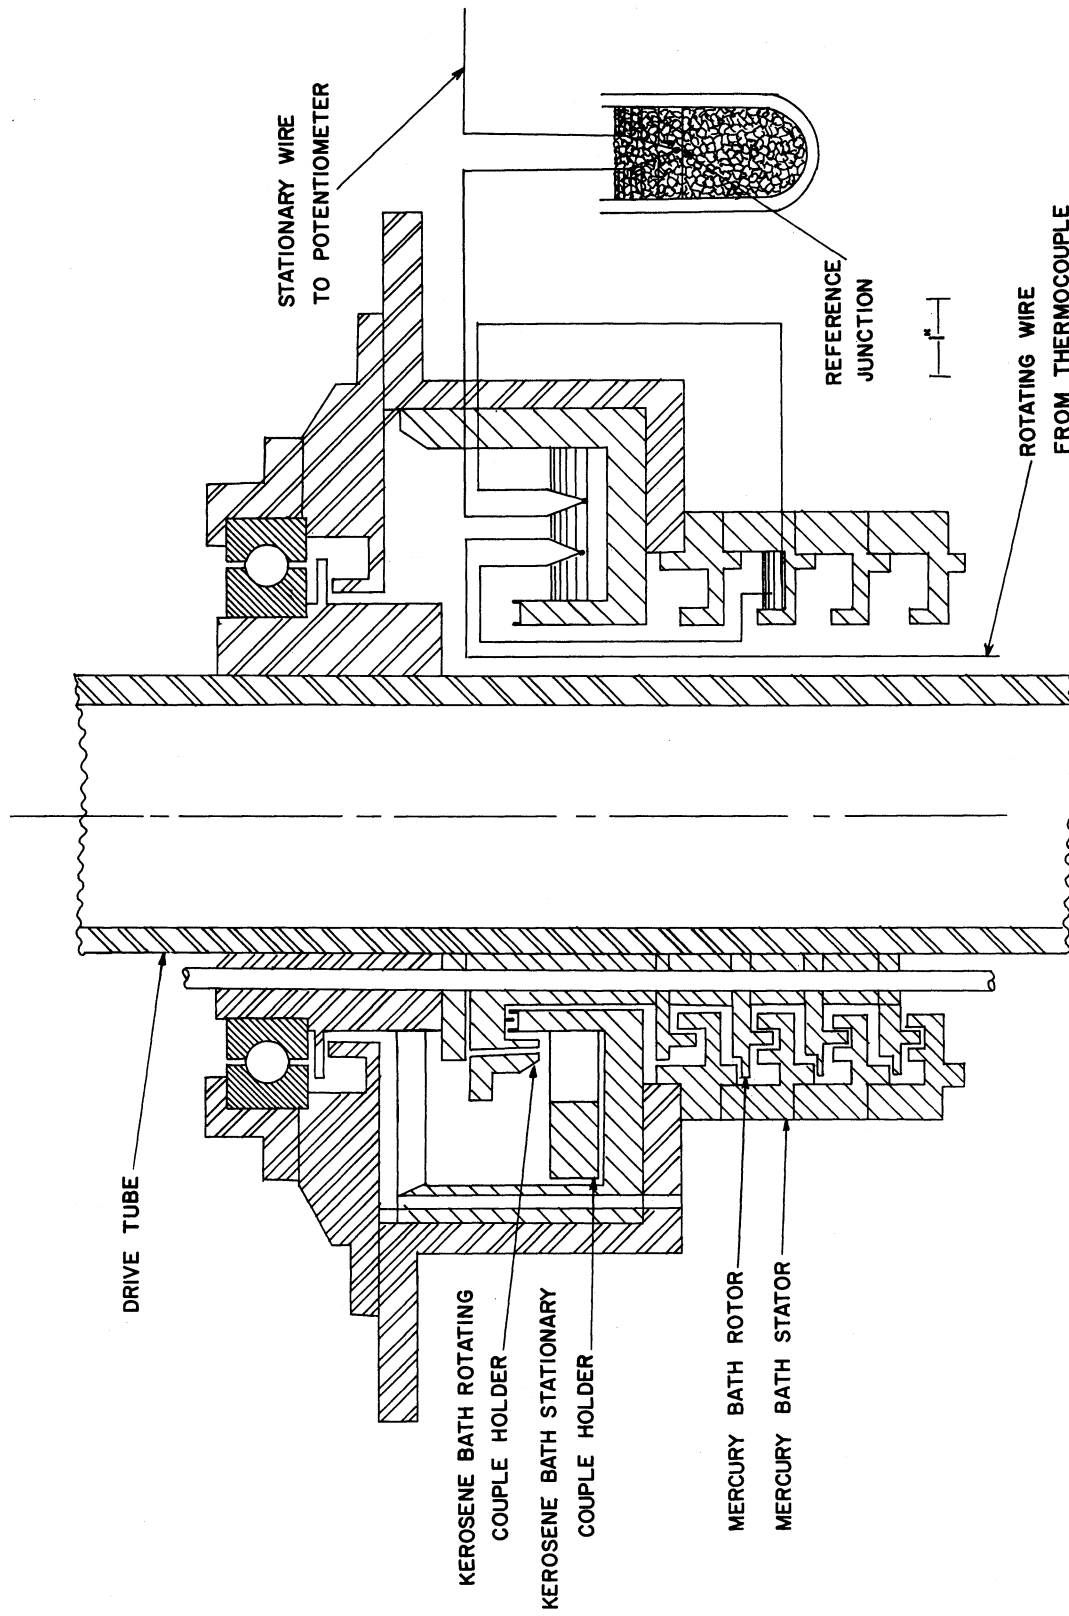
Detail Drawing of Mercury Slip Rings and Kerosene Bath.
